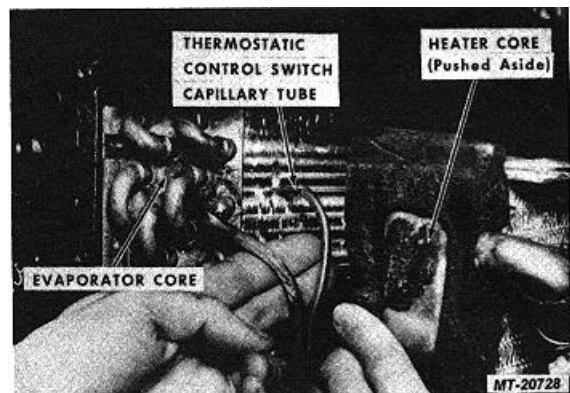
Withdrawing Thermostatic Control Switch Capillary Tube from Evaporator Core
